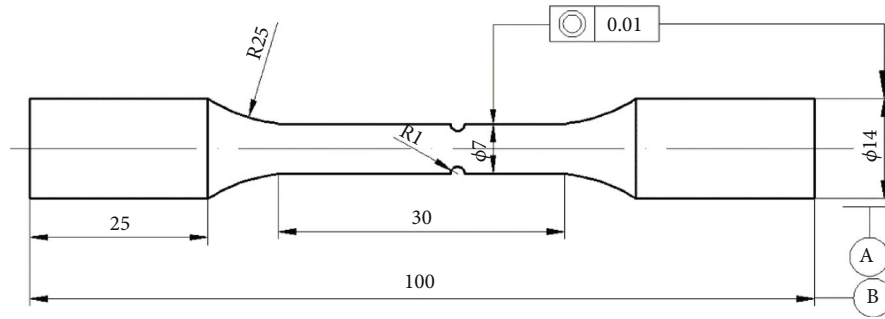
Schematic diagram showing the shape and size of fatigue specimen.
